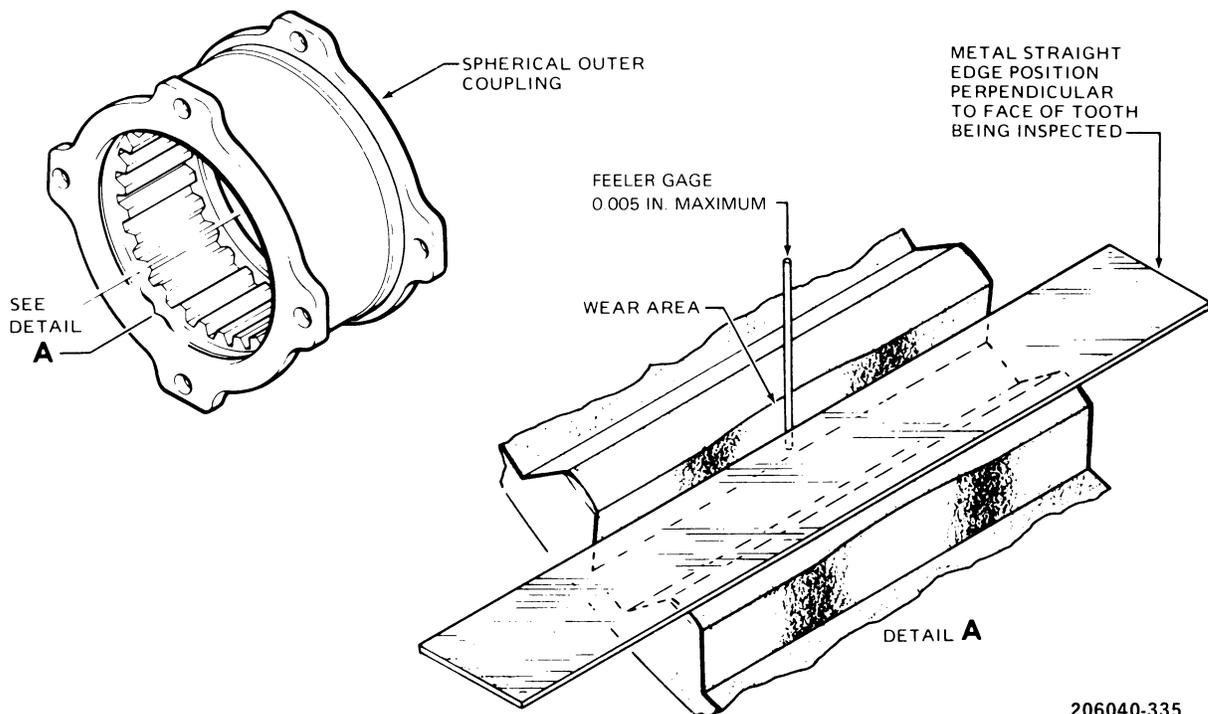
A. Spherical Outer Coupling Spline Teeth — Inspection
